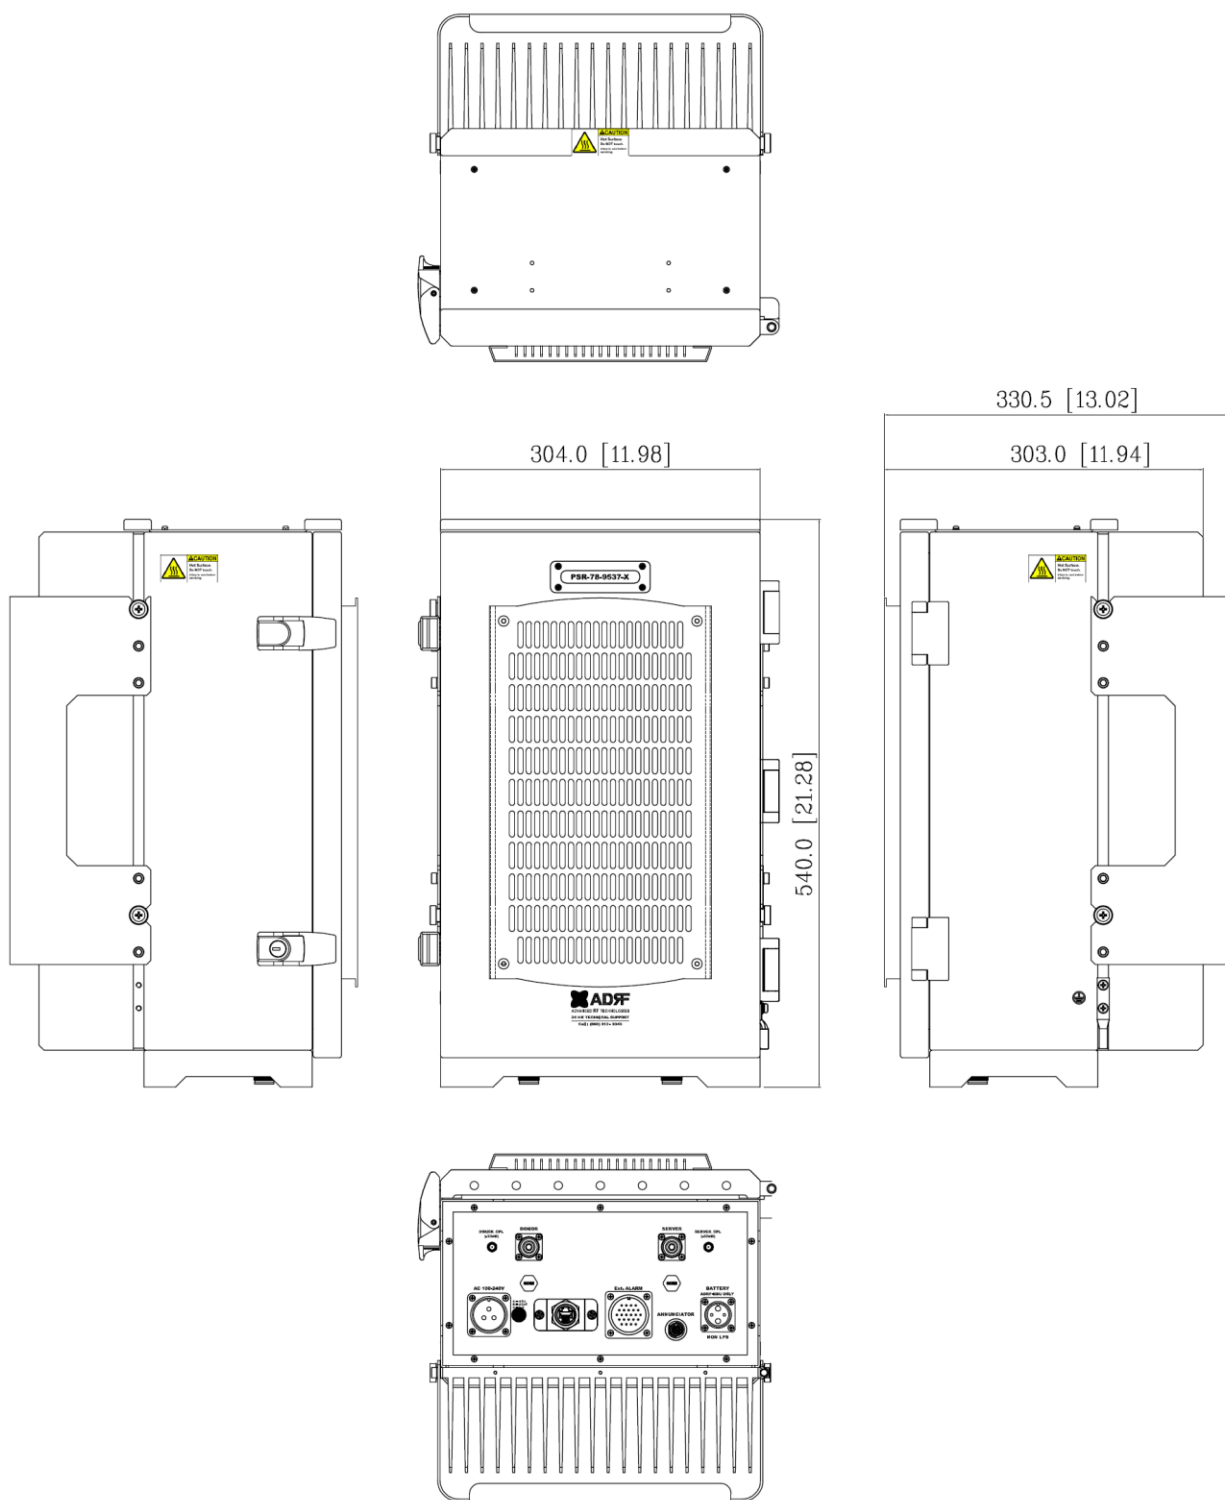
PSR-78-9537-XB Mechanical Drawing
